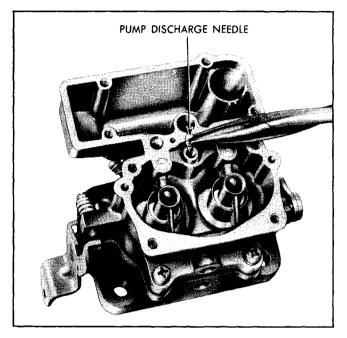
B-25 Installing Pump Discharge Needle-Carter
